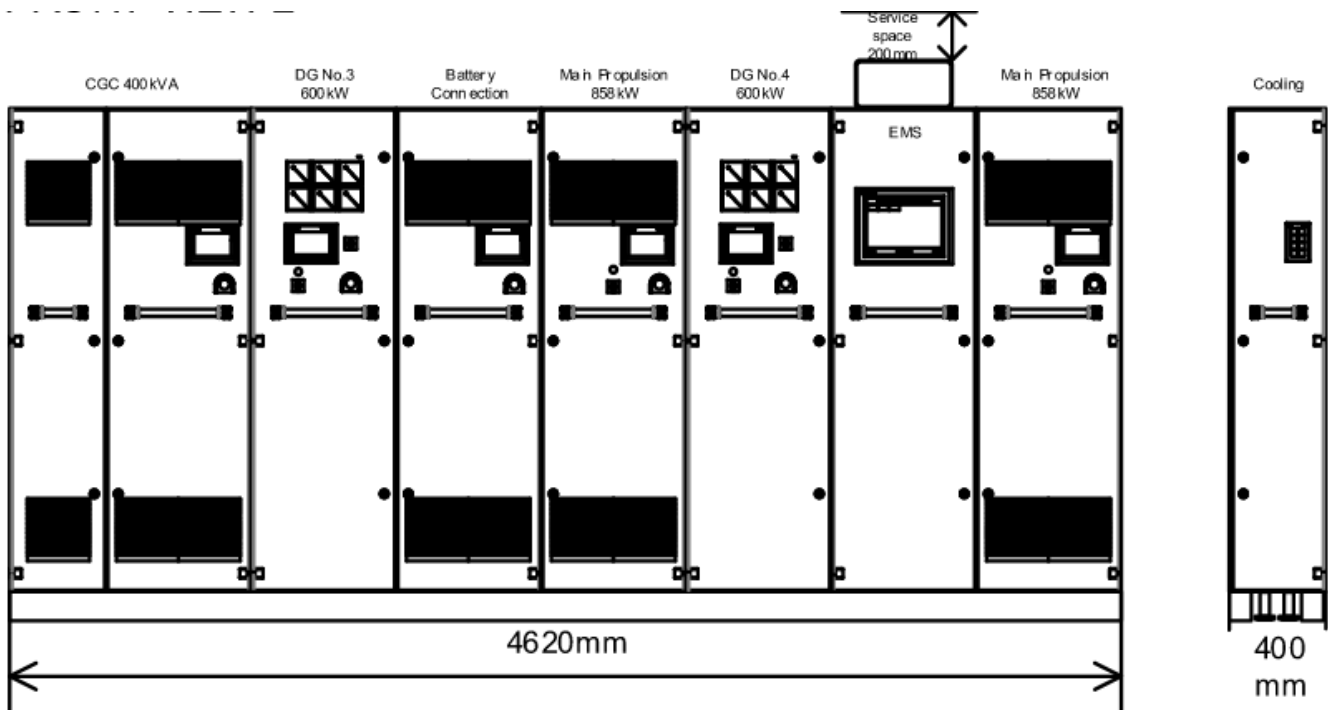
Preliminary front and rear dimension drawing SWBD #1
